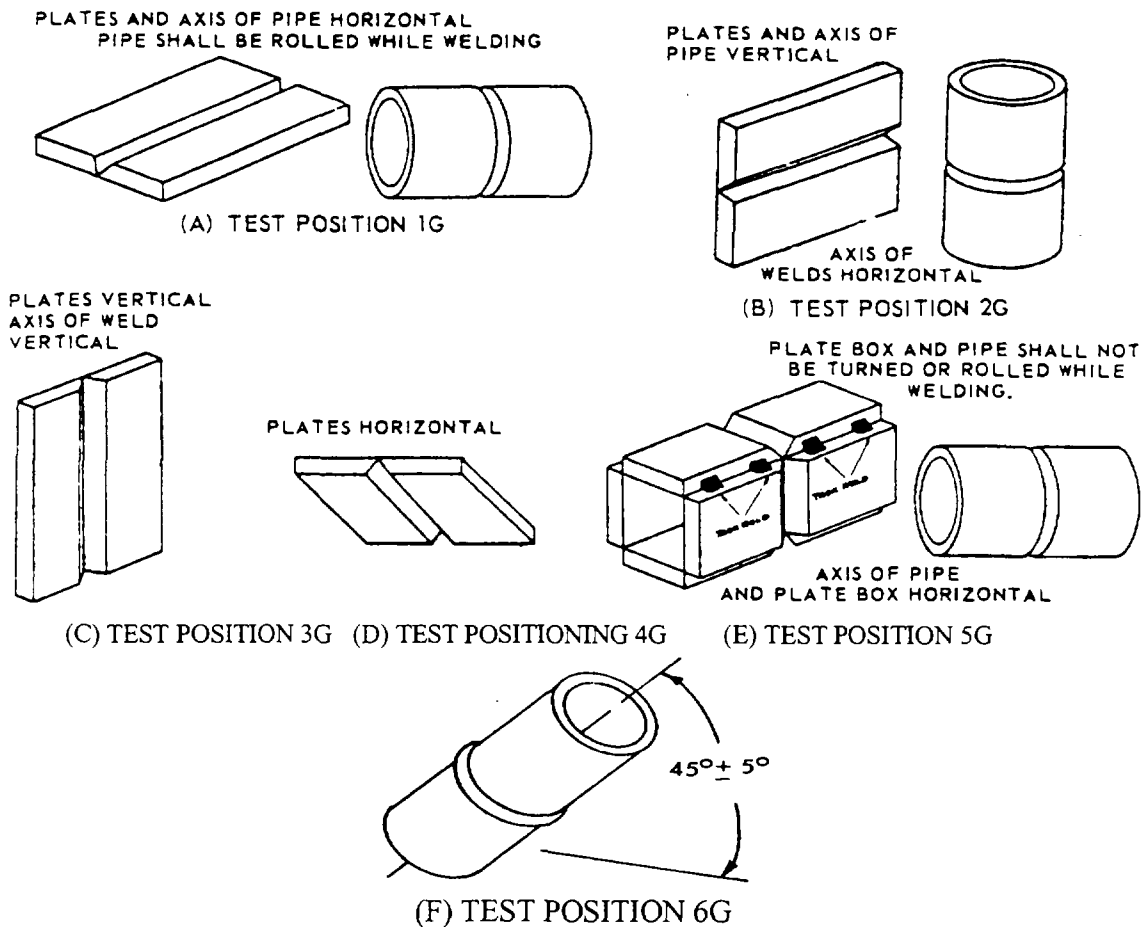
Positions of plates and pipes for groove weld.
